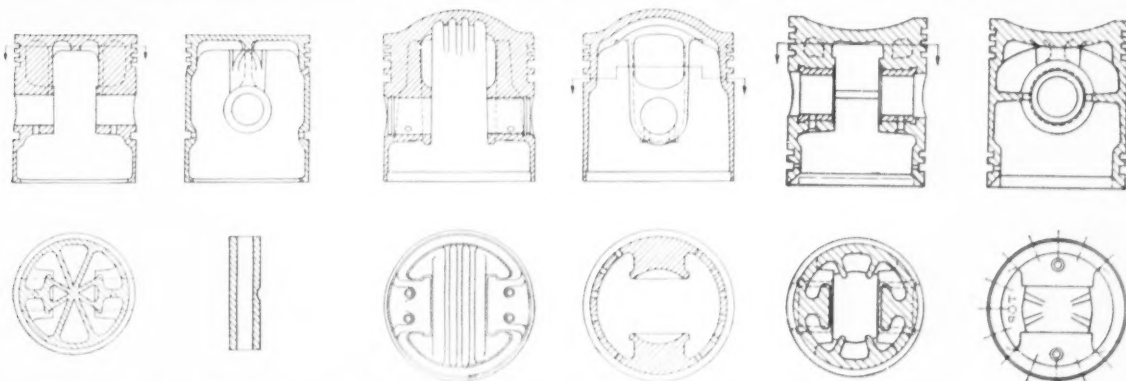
Left: this early type, 63 mm diameter, solid skirt piston for a petrol engine has radial ribs under the crown, and I-section boss support struts. Right: the 78 mm diameter solid skirt piston for the Lagonda engine has a recess machined in each boss support strut for lightness, and the inner edges of the boss and strut are lipped for strength
